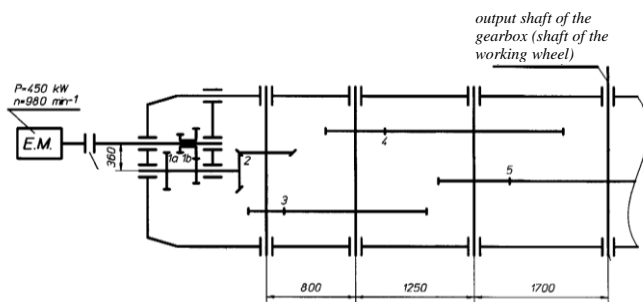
Scheme of the gearbox speed reducer with the working wheel of the excavator SRs-630
